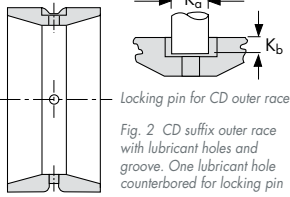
CD suffix outer race with lubricant holes and groove. One lubricant hole counterbored for locking pin
